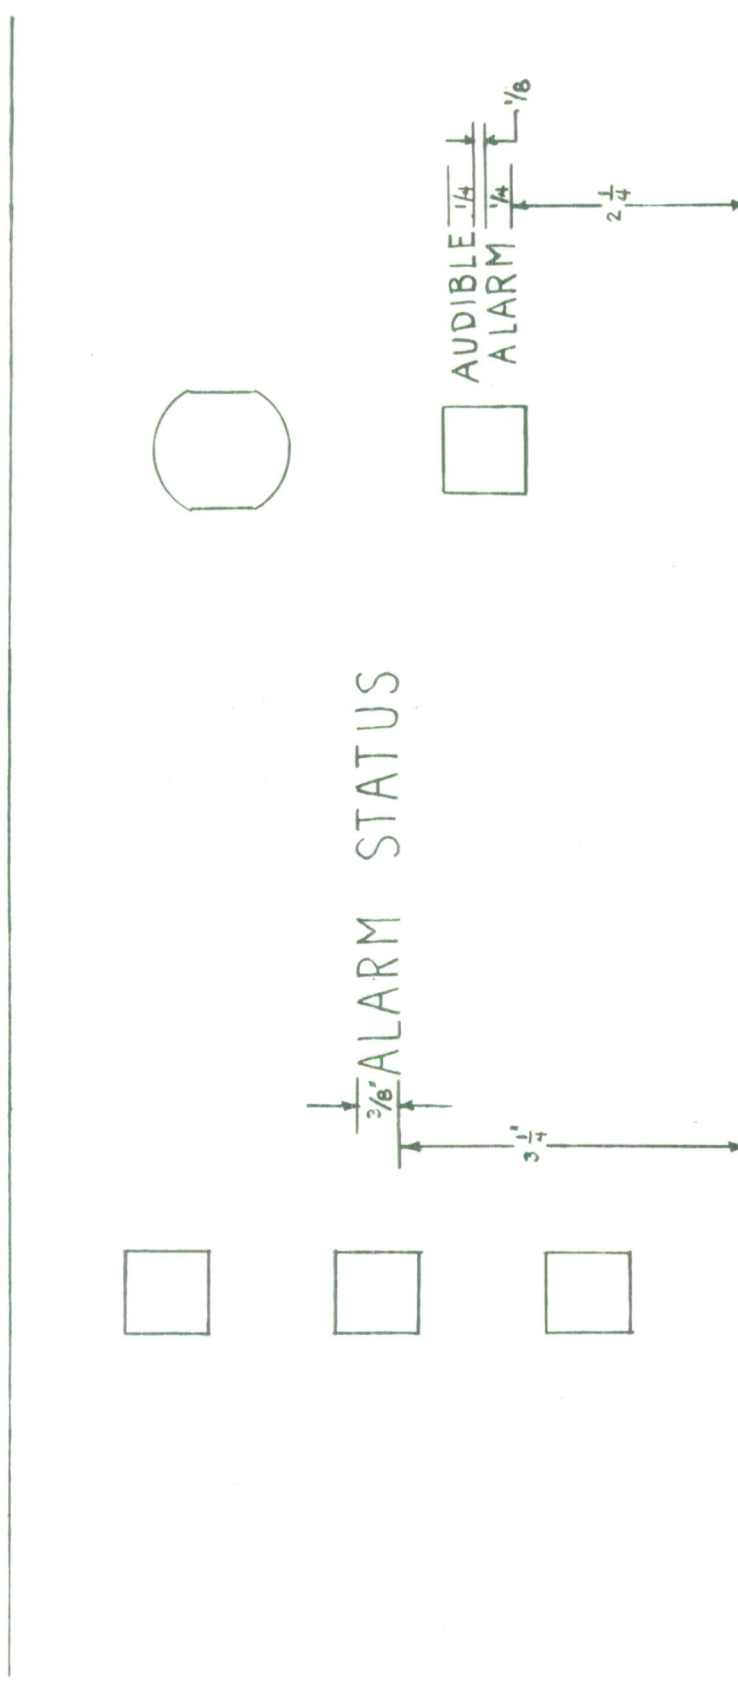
Alarm Status Panel Engraving Black Anodize After Machining - White Fill on Engraving (Sheet 2 of 2).
